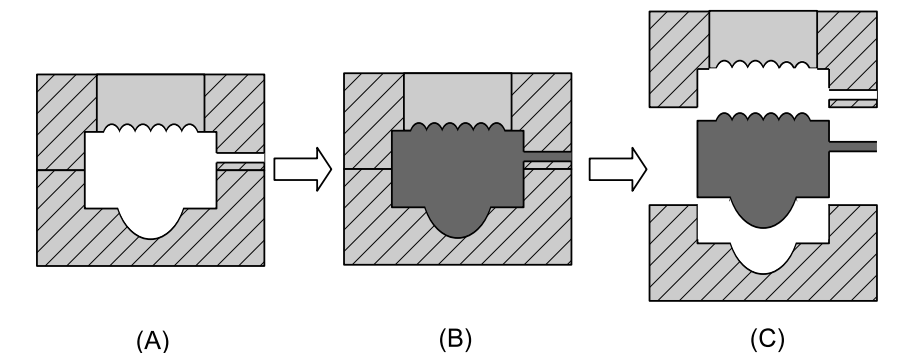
The injection moulding process. (A) Cycle start with an empty mould. (B) Injection of molten material into the cavity. (C) Cooling and ejection of the moulded part.
